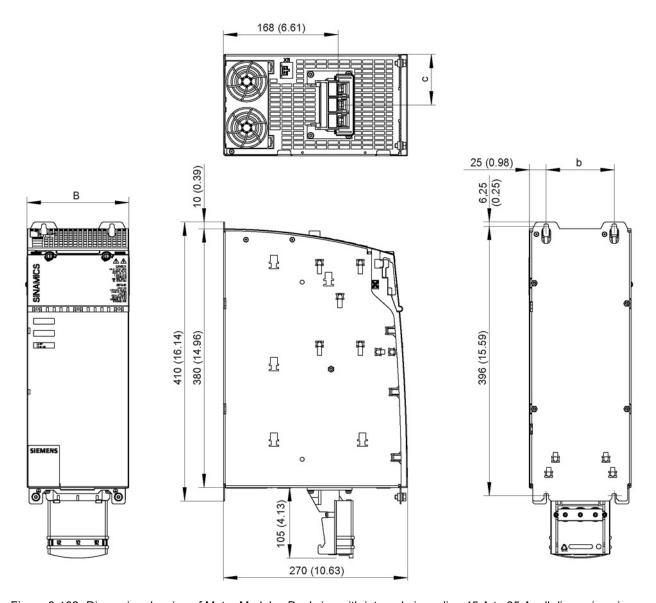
Dimension drawing of Motor Modules Booksize with internal air cooling 45 A to 85 A, all dimensions in mm and (inches); example 45 A
